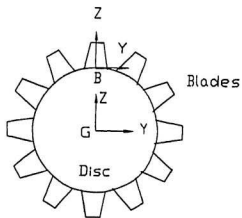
SCHEMATIC OF ROTOR DISC AND THE TURBINE BLADES
